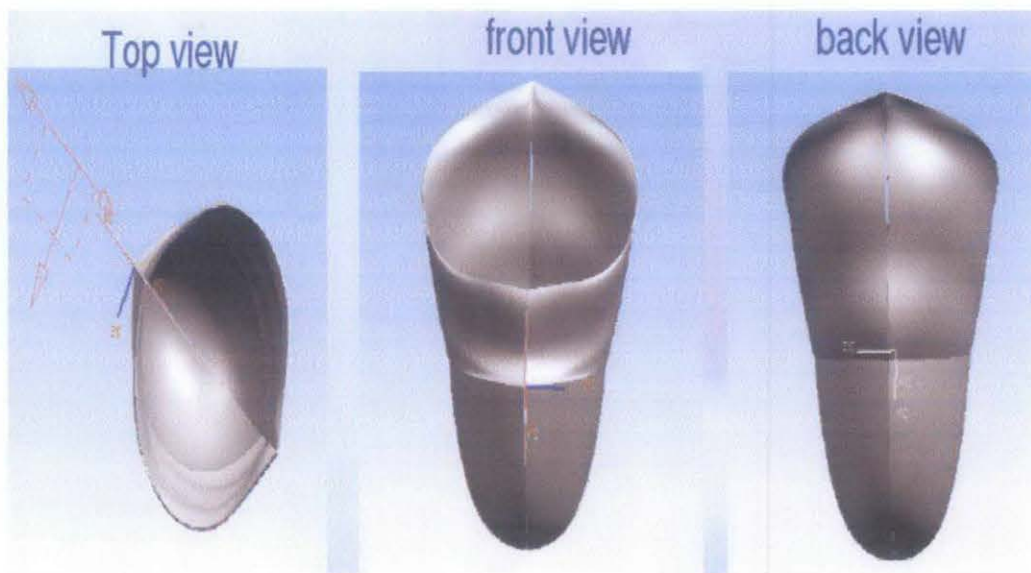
The completed part of mold stump after combined all the 4 parts together by using Unigraphics.
